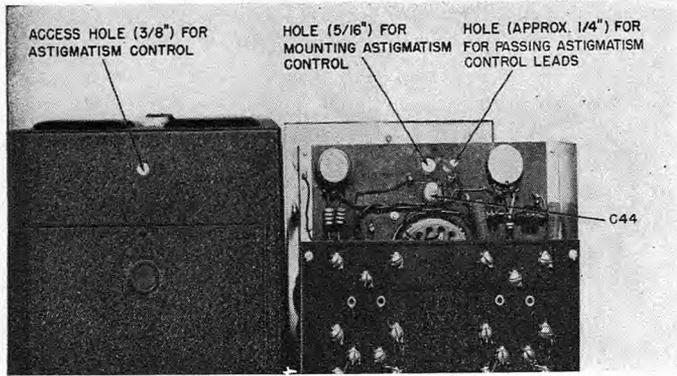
Rear chassis and cabinet rear of Type 304-H showing C44 relocated and necessary holes drilled to mount, wire, and adjust astigmatism control
